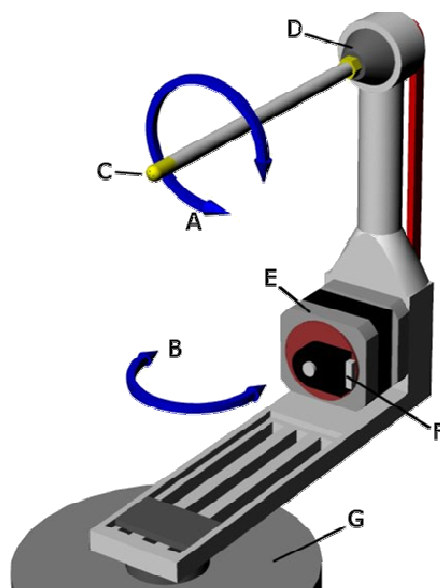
A calibration mechanism with stepper motors to control cone and roll.
